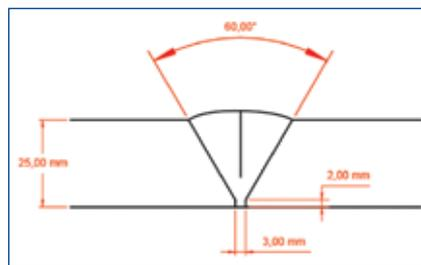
A butt weld to be inspected using the ultrasonic testing (UT) method.
